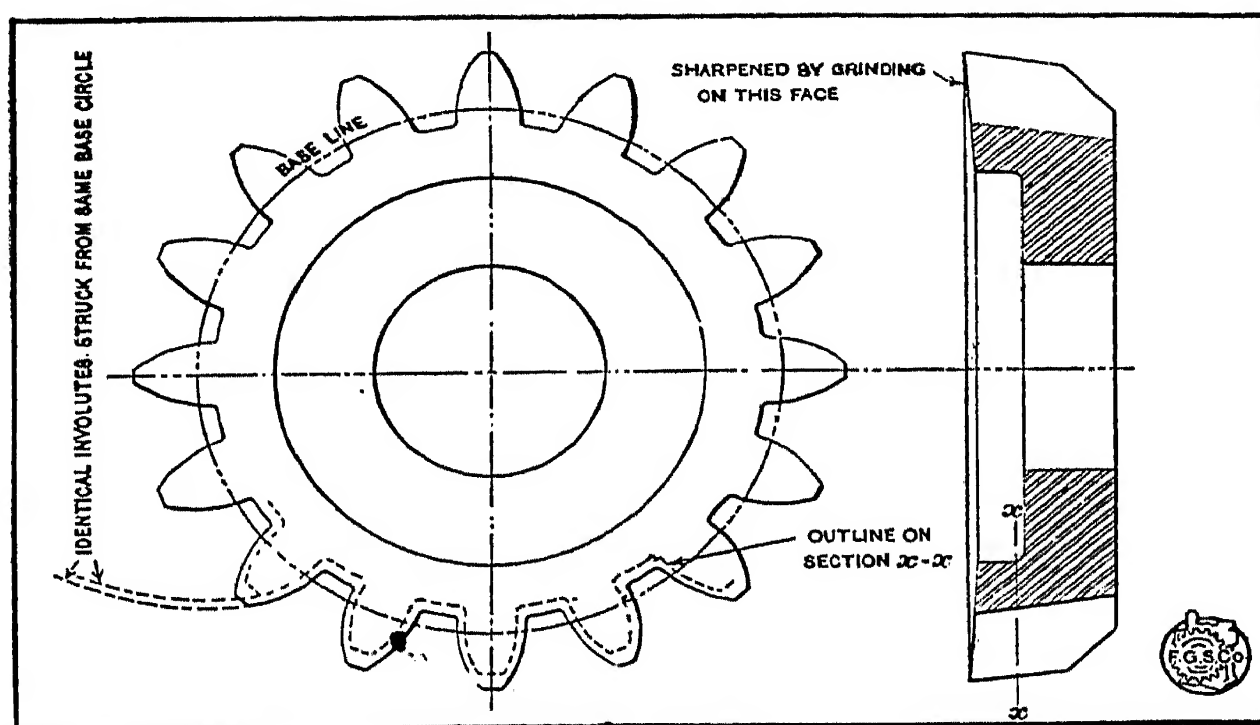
A pinion type gear shaper cutter. (Courtesy The Fellows Gear Shaper Co.)
